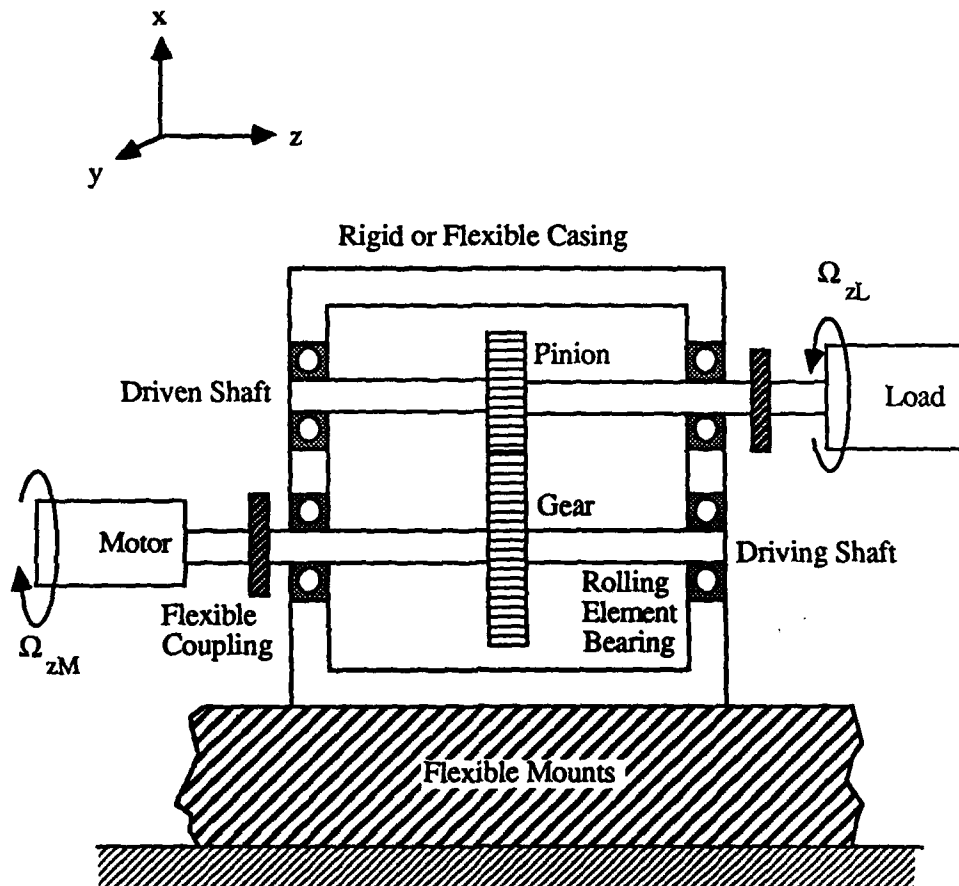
Schematic of a geared rotor system with flexible shafts and rigid spur gear and pinion, and supported by 4 rolling element bearings on a flexibly mounted casing. The shaft at the motor end is driven at mean speed Ω_{zM} which in turns drives the load at mean speed Ω_{zL} . This physical system is symmetric about a plane intersecting both the driving and driven shafts. The y axis is assumed parallel to the gear mesh line of action in the pressure angle direction at mesh point. This schematic is used for example case II and III.
